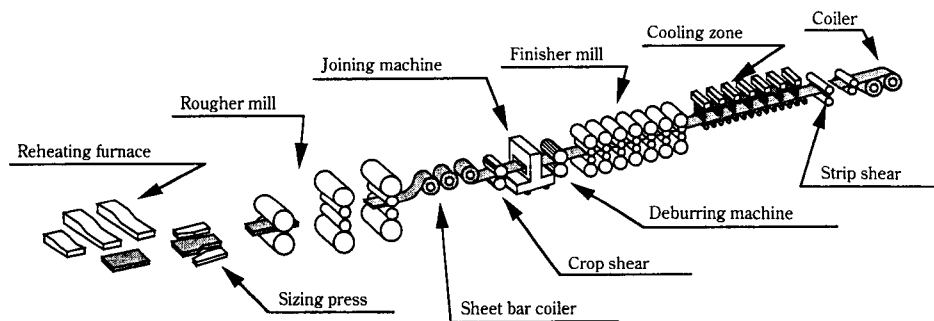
Layout of No. 3 hot strip mill in Chiba Works
